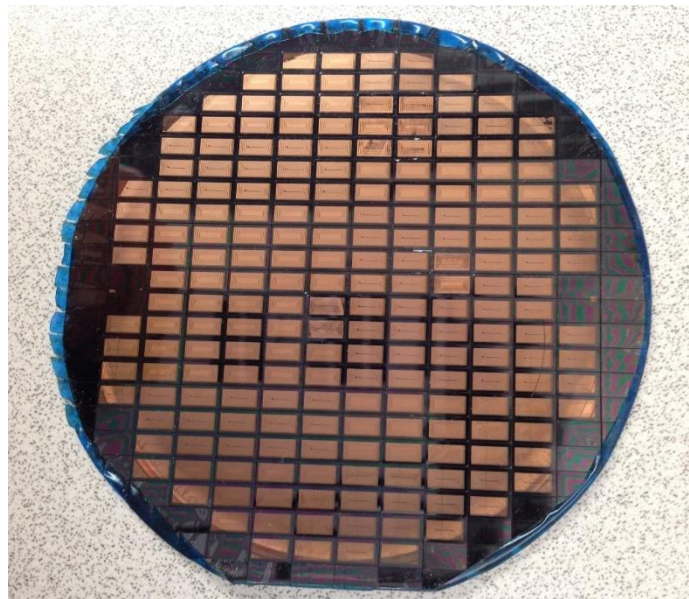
Diced multiple sensors of silicon layer used dicing saw tool
